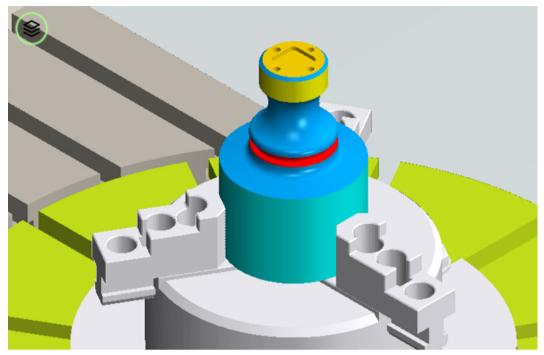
Stock removal simulation Machined surfaces are displayed in the colors of the tool cutting edges
